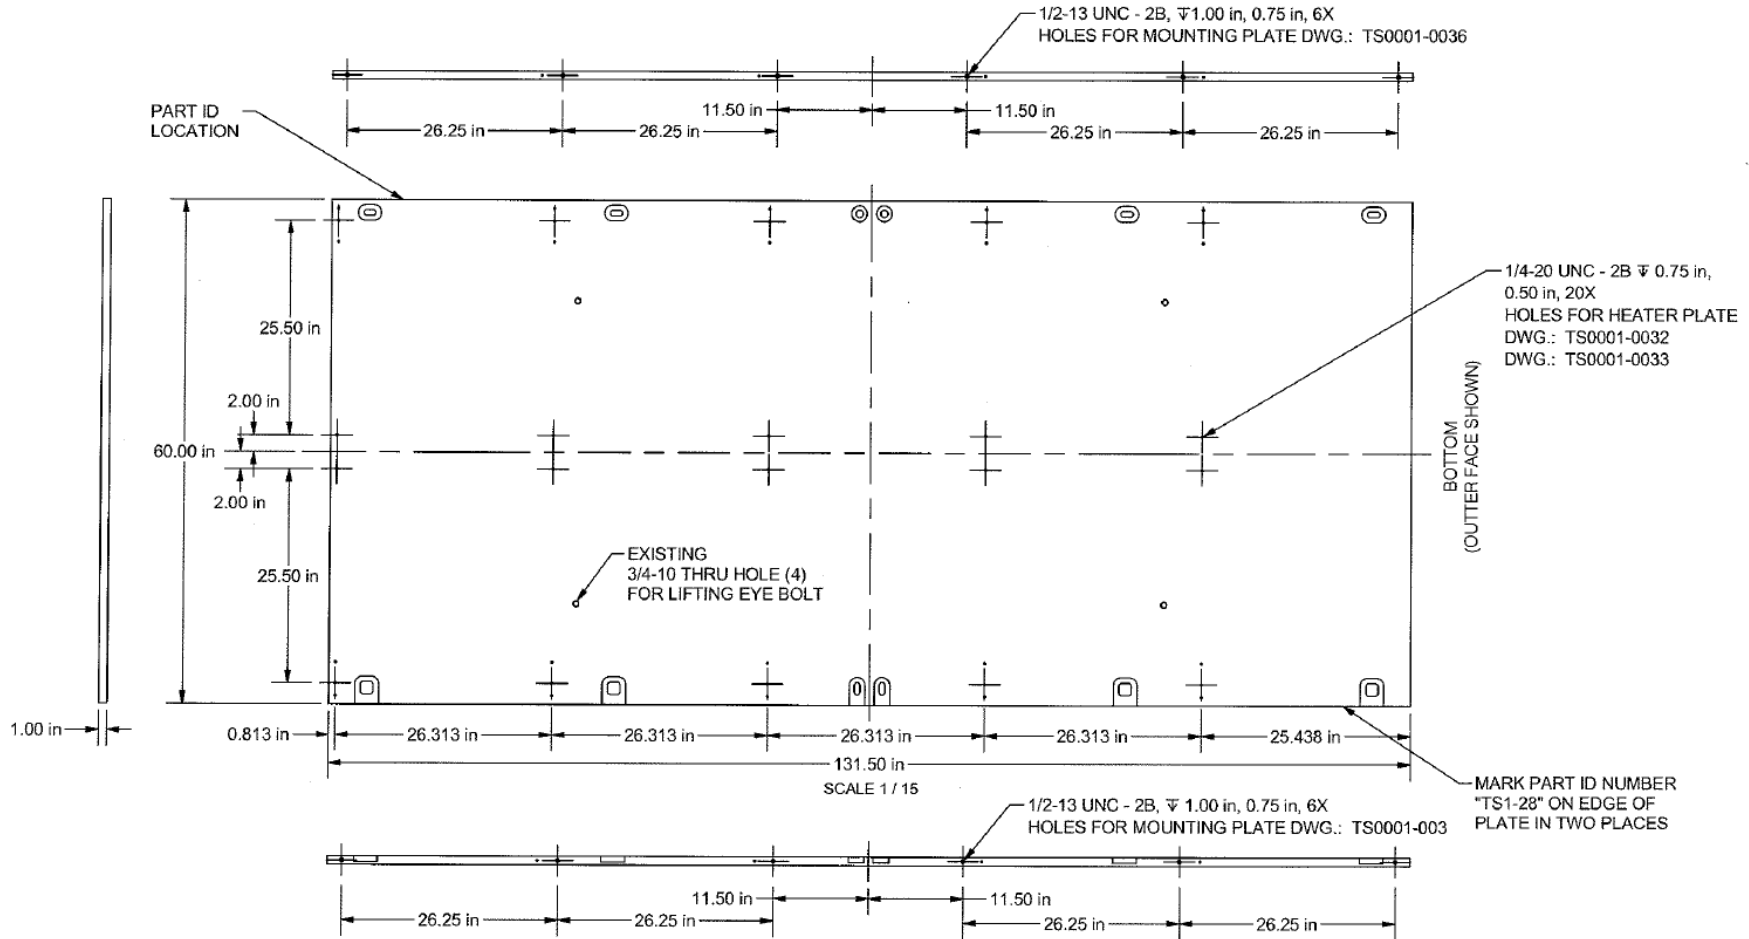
Dimensions and mounting hole specifications of primary heated plate (top shown)
